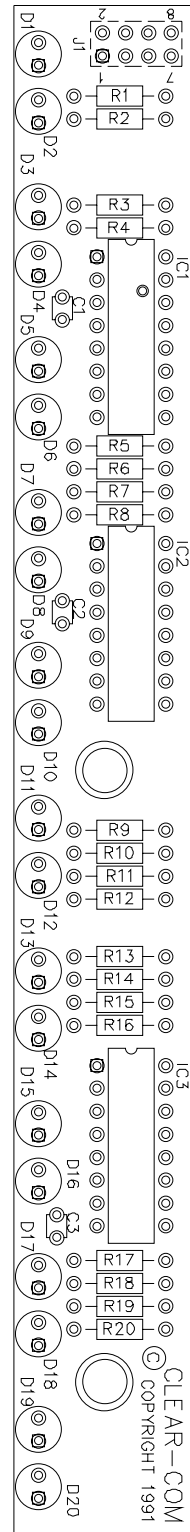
Assembly Drawing ICS-102/102T Selector Switch LED PCB Rev.A
